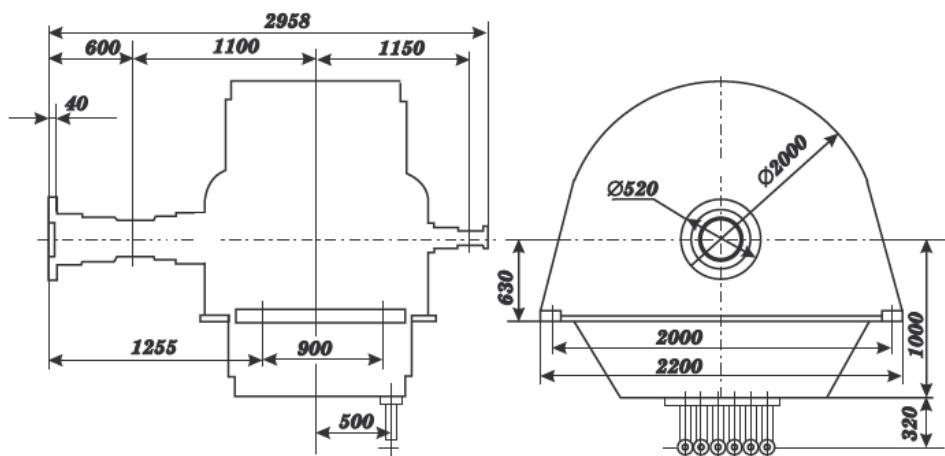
Overall and mounting dimensions of the motor AC3-2-17-61-6У3
